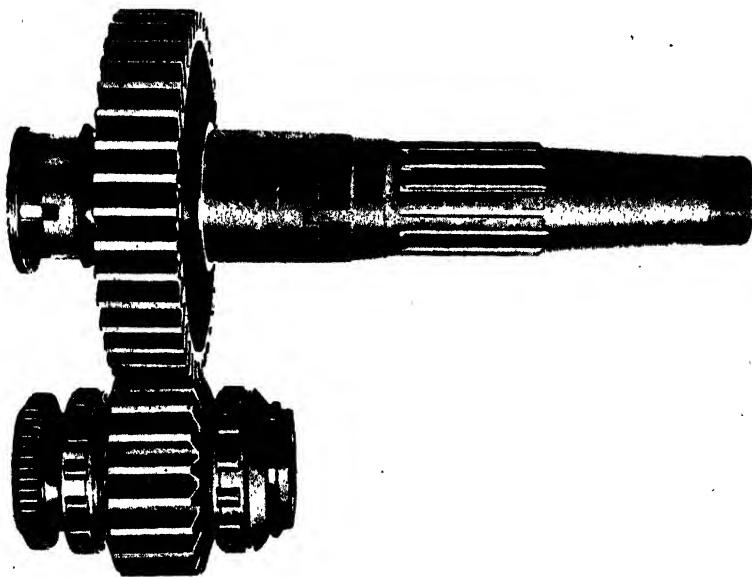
Crankshaft Pinion, Airscrew Shaft and Gear.
